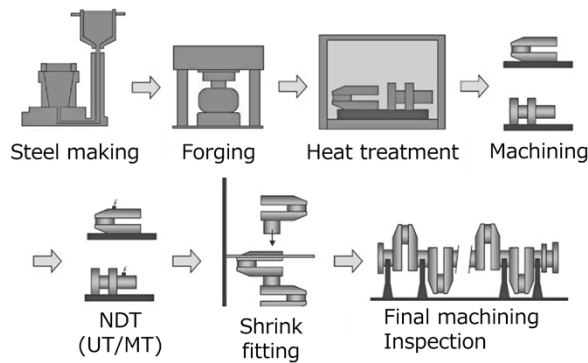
Manufacturing process of semi-built-up type crankshaft
